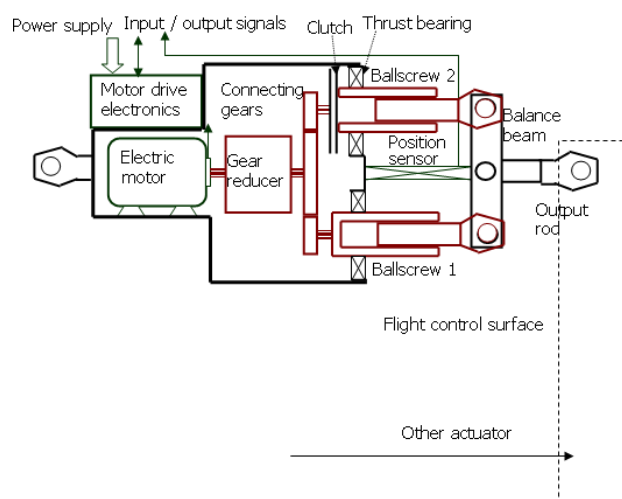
Design concept of a jam tolerant actuator with parallel drive paths and balance beam
